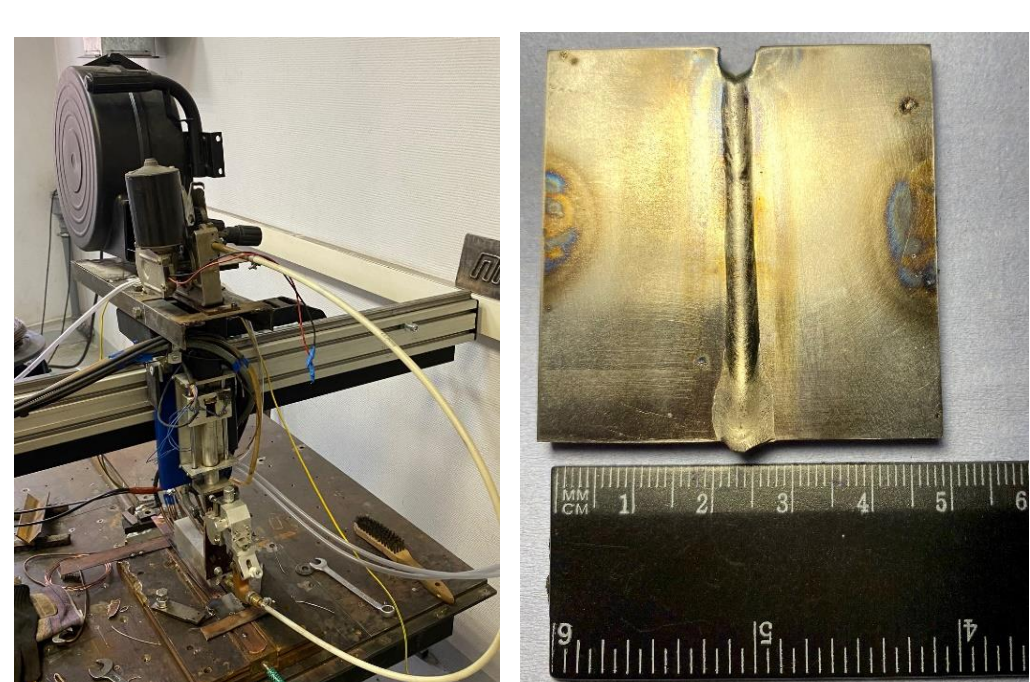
Plasma welding equipment and the appearance of the welded joint
